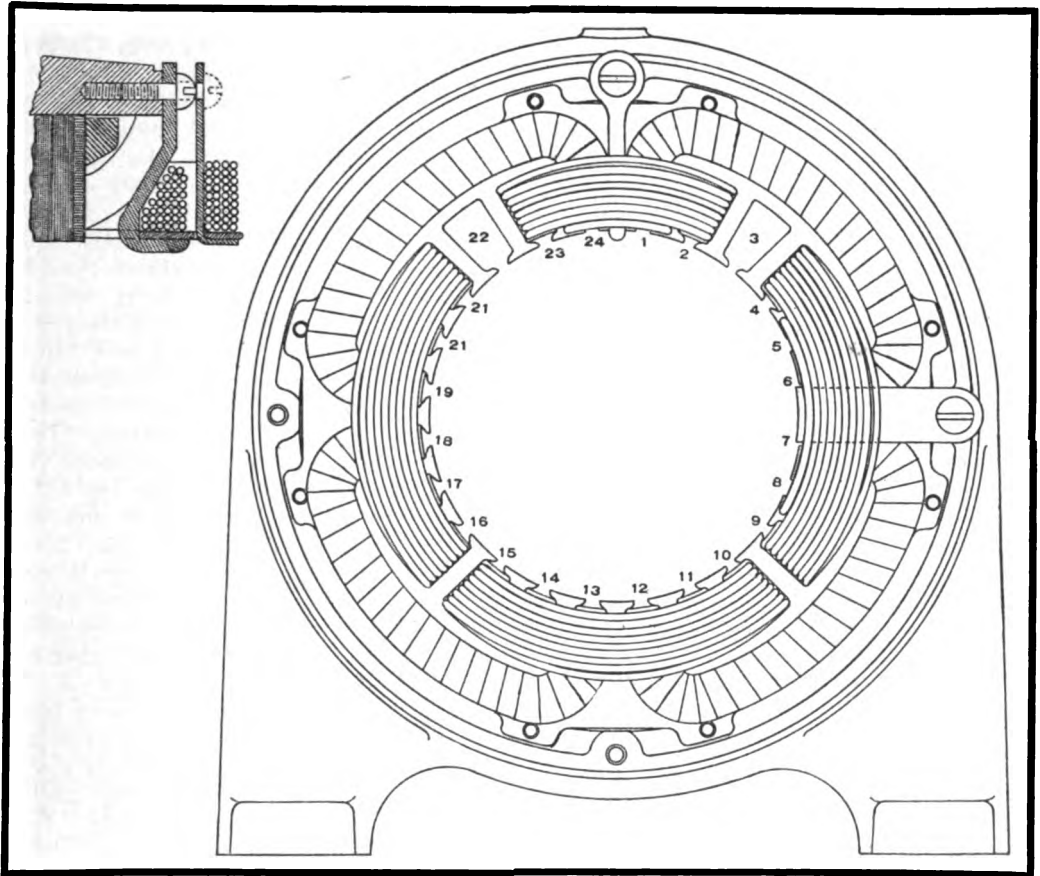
STATOR WINDING FOR SINGLE-PHASE MOTOR. STARTING COILS COMPLETED AND TAPED; RUNNING COILS NEARLY FINISHED
